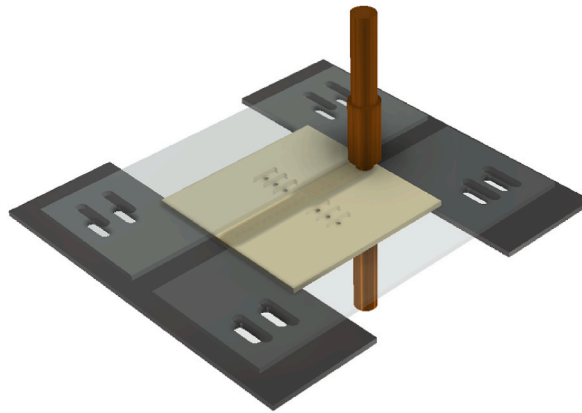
Illustration of the double side friction stir welding process.
